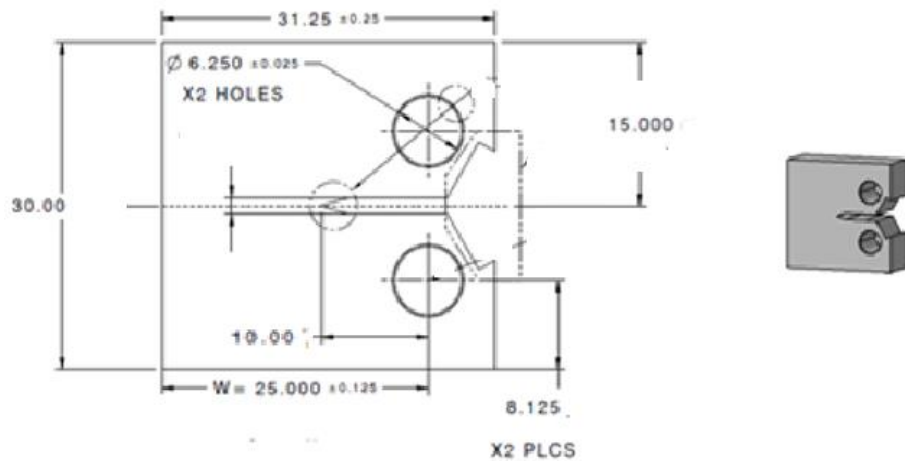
Dimension of the fatigue toughness test specimen per ASTM E399
